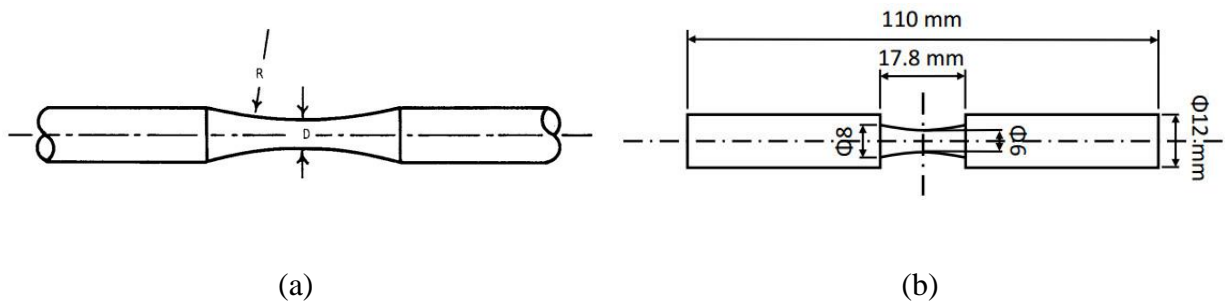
Draft of rotating bending test samples: (a) standard test sample;
